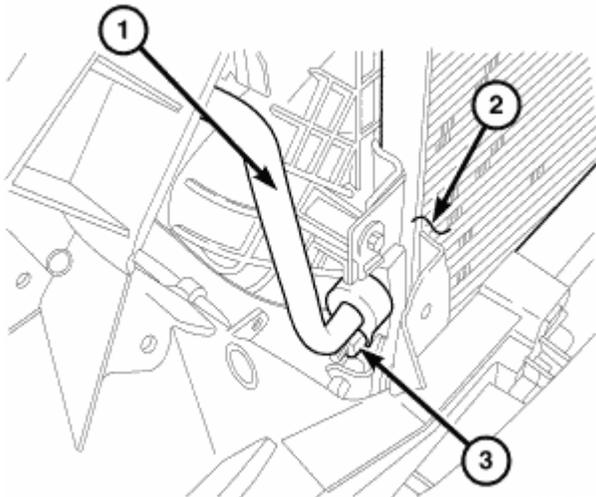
Removing/Installing Nut That Secures A/C Discharge Line To A/C Condenser
